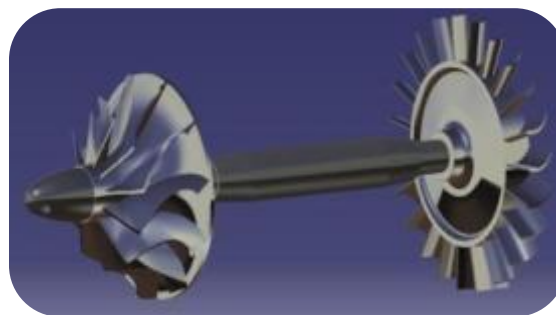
Shaft mounted power turbine and compressor in micro gas turbine [17]
